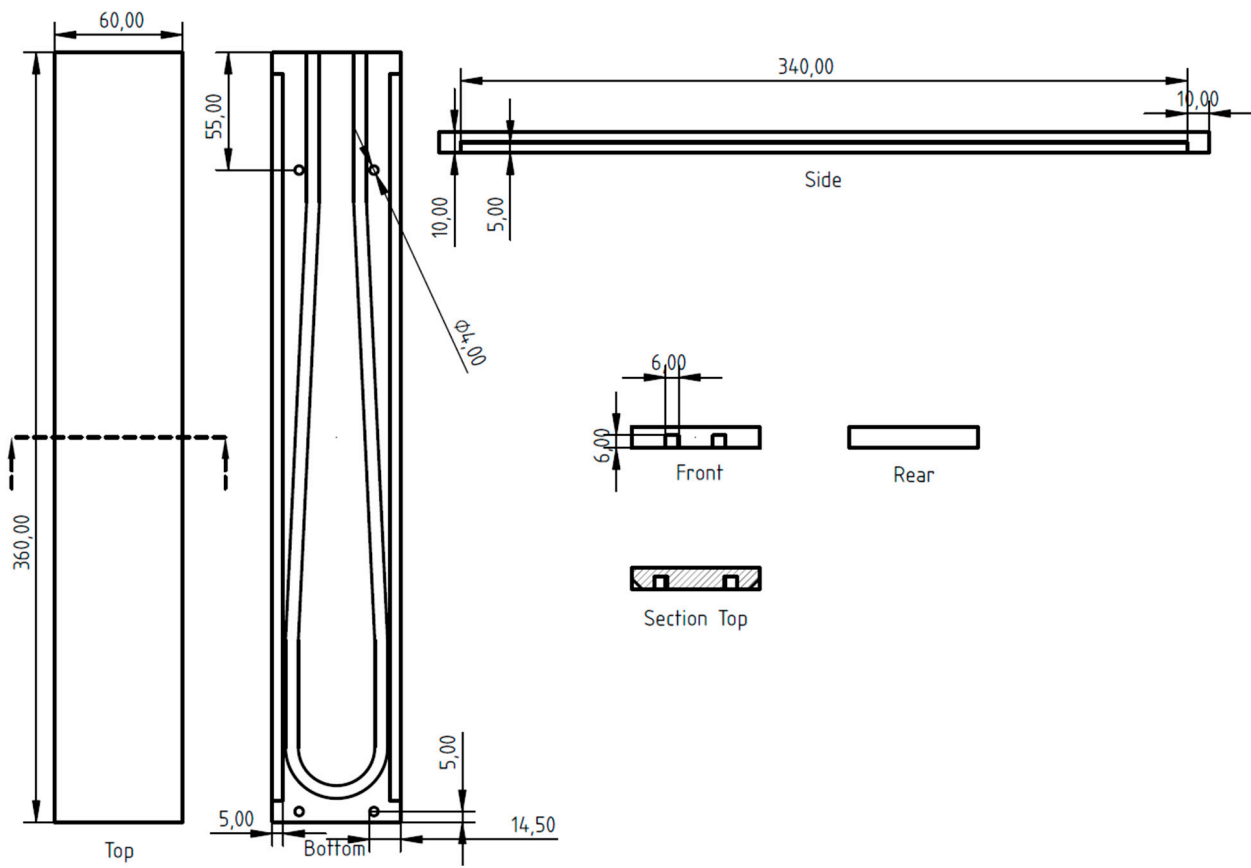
Technical drawing of the heat exchanger. Dimensions in mm. A comma is used as decimal separator in this figure.
